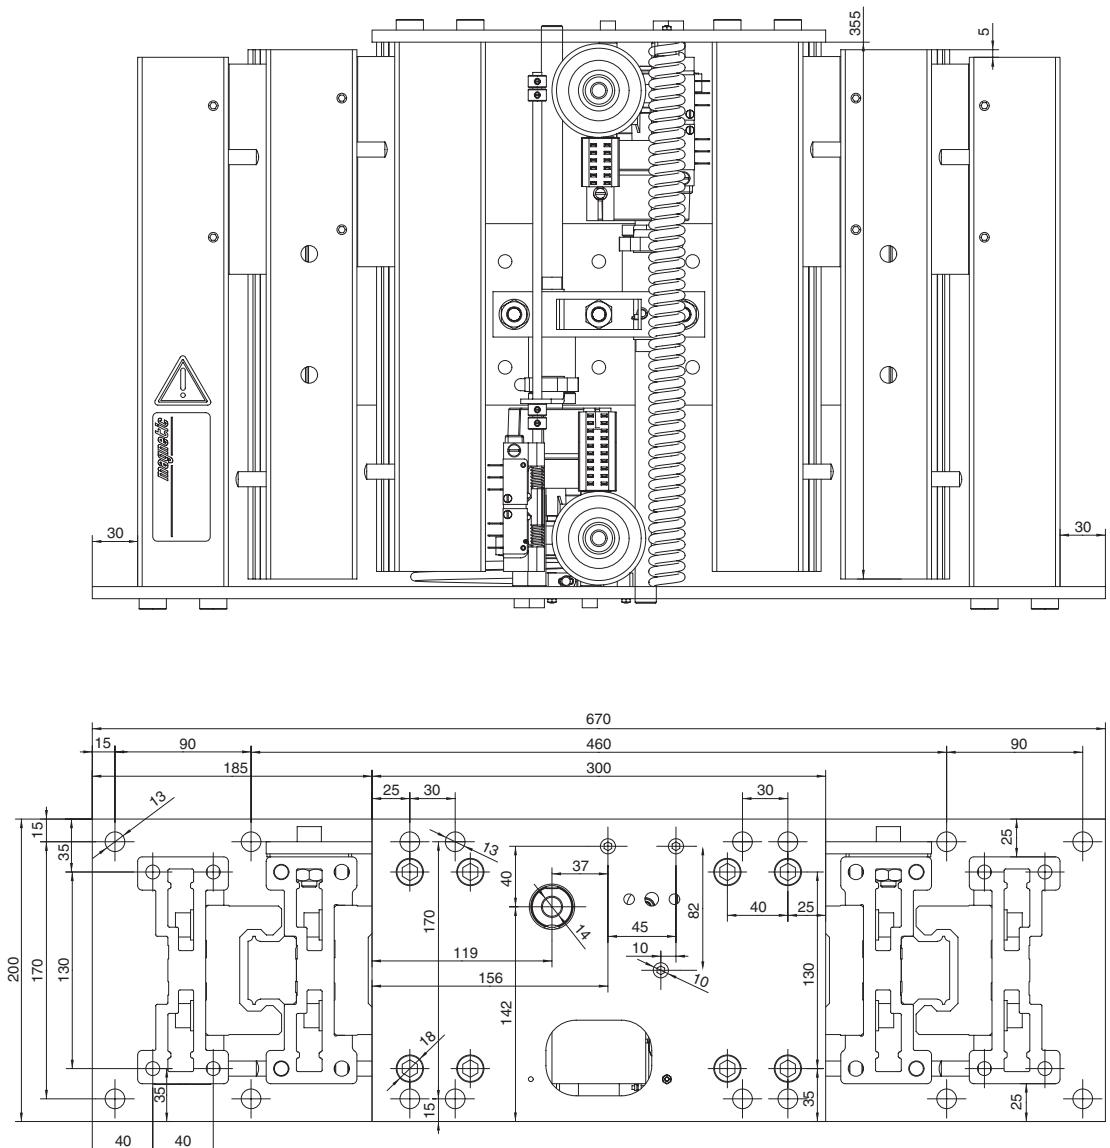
TMS dimensional drawing TMS10 Easy type drive (Dimensions in MM; 1 mm= 0.0394 inch)
